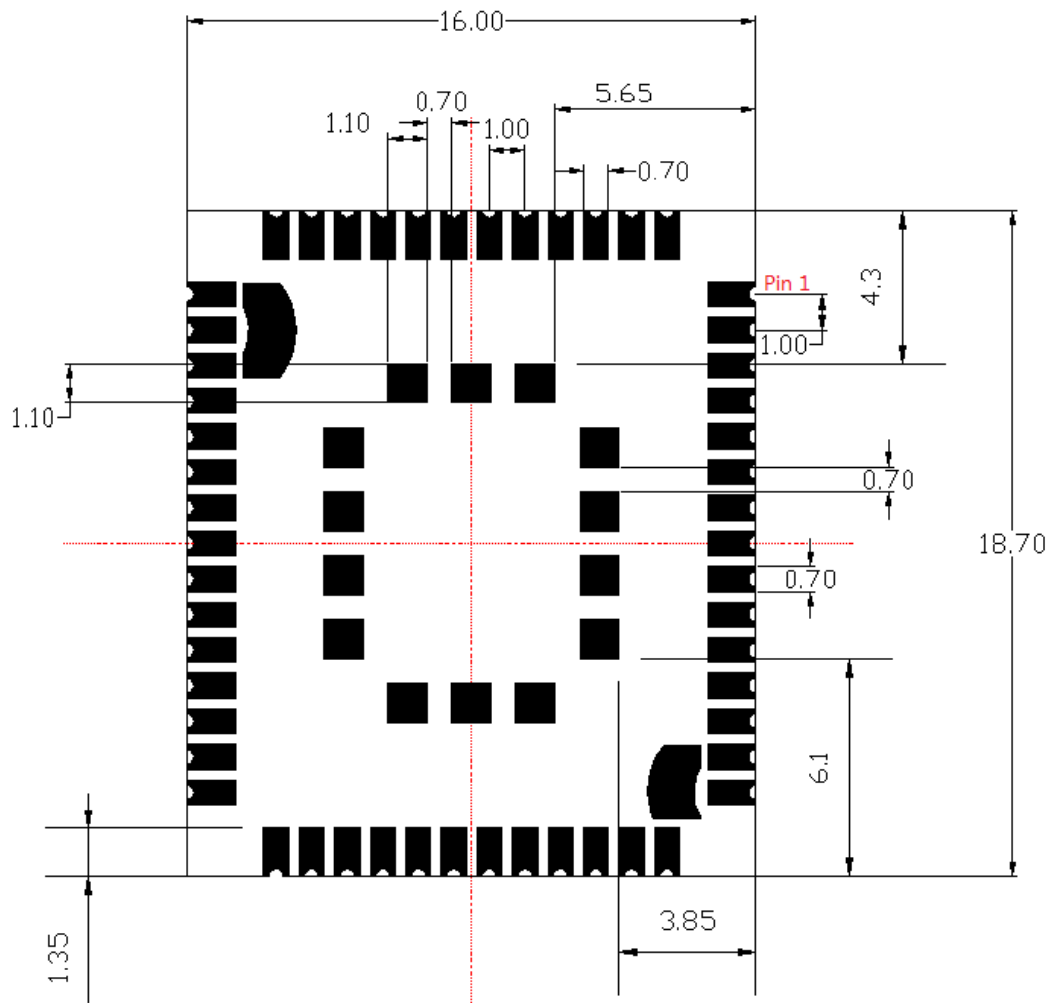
MC65-OpenCPU Bottom Dimensions (Unit: mm)
